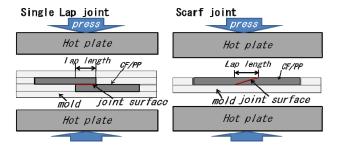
Joint geometries and measures; (Left) Single lap joint (Right) Scarf joint
